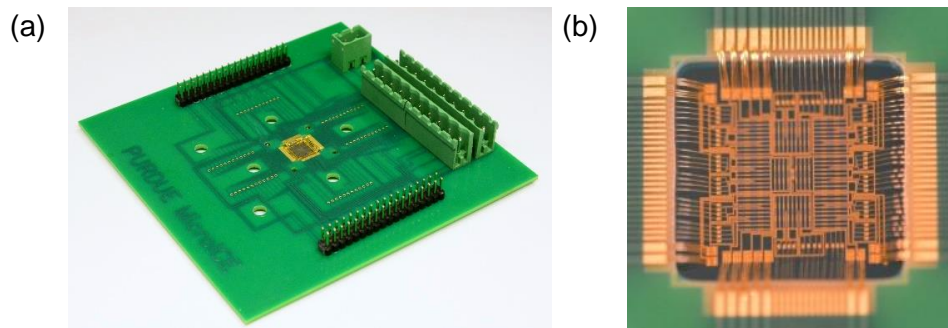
(a) Photograph of the test chip mounted to the PCB with heaters and sensors face up and (b) zoomed-in view of the heaters and sensors wire-bonded to PCB contact pads.
